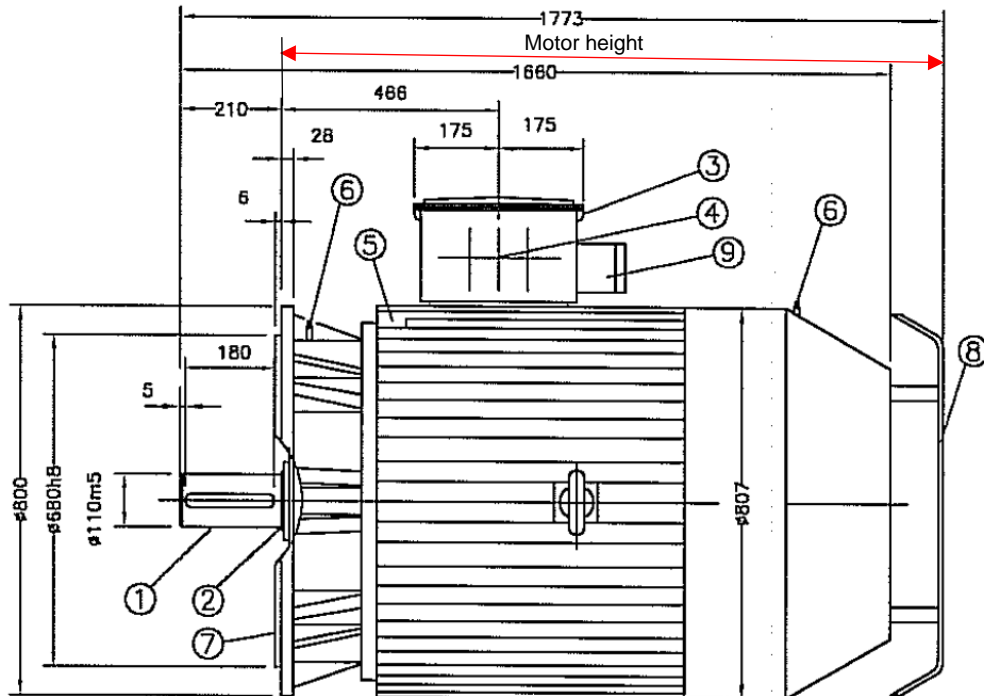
Current installed motors dimensions. The new motor shall have the same shaft and flange size to be interchanged with the current motors.
